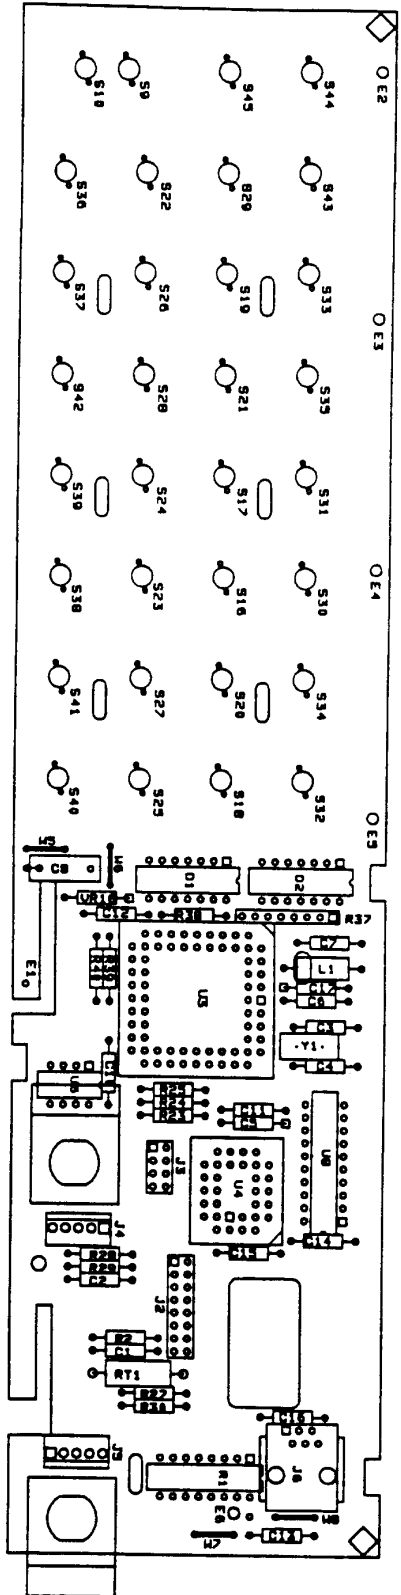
A1 Front Panel Board, Component Location Diagram
